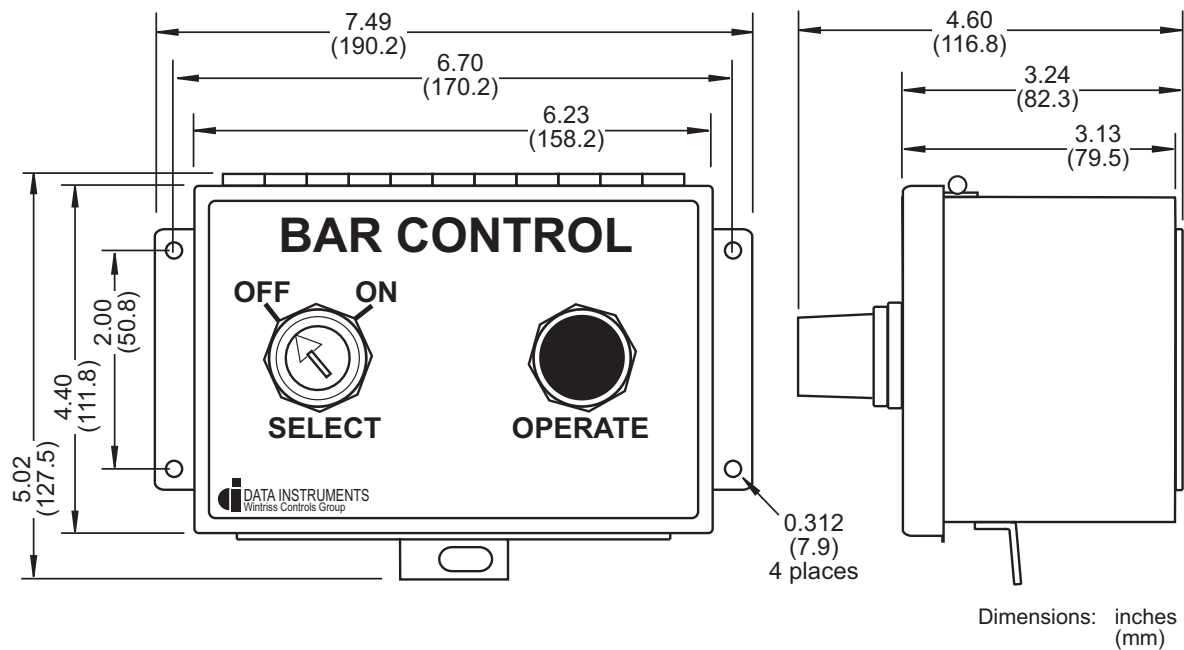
Bar Control Enclosure: Mounting Dimensions
